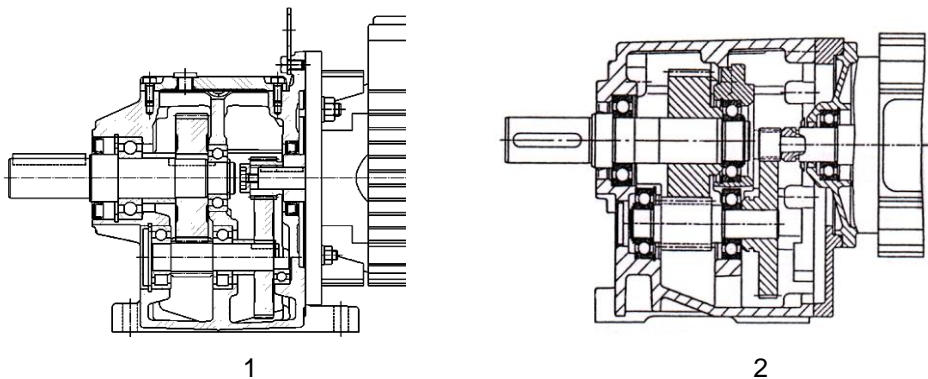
Characteristic gear motor solutions (1) with standard IEC motor ROSSI [10] and (2) special gear motor LENZE [6]
